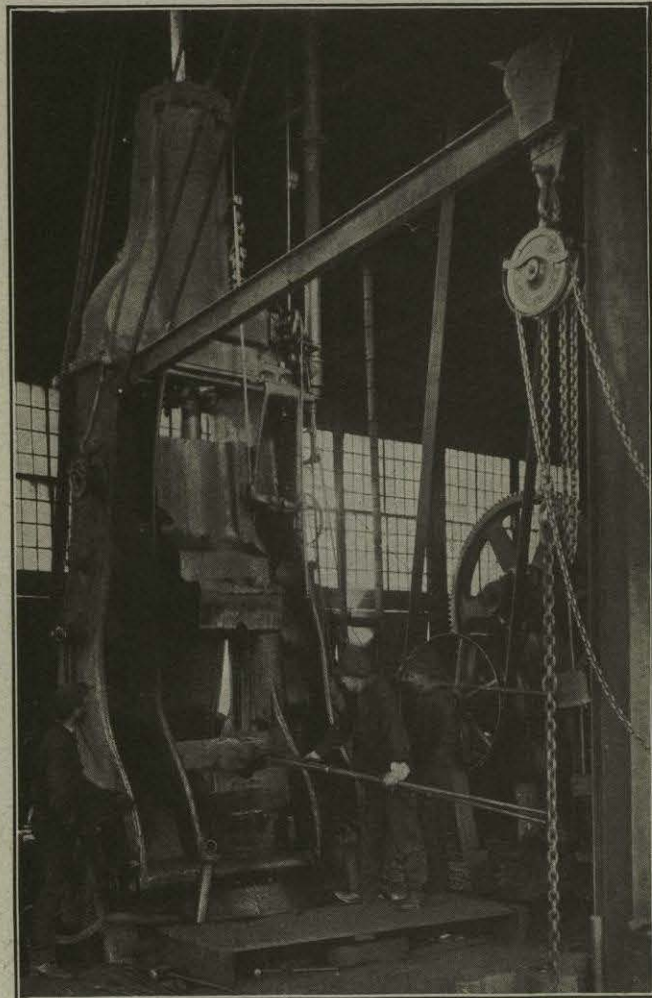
400-pound crank-shaft under hammer ready to drop the die.
